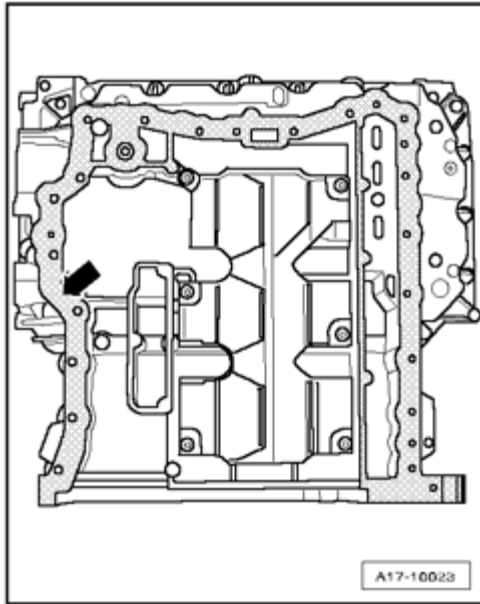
Applying Sealant Bead On Clean Sealing Surface Of Upper Section Of Oil Pan
